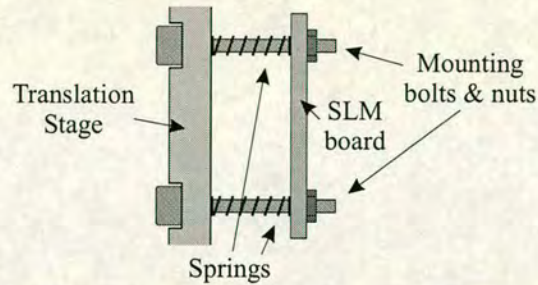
Detail of the mounting holding the SLM header PCB onto the translation stage. Adjustment of the nuts allows for tilting of the PCB about an axis perpendicular to the optic axis of the system.
